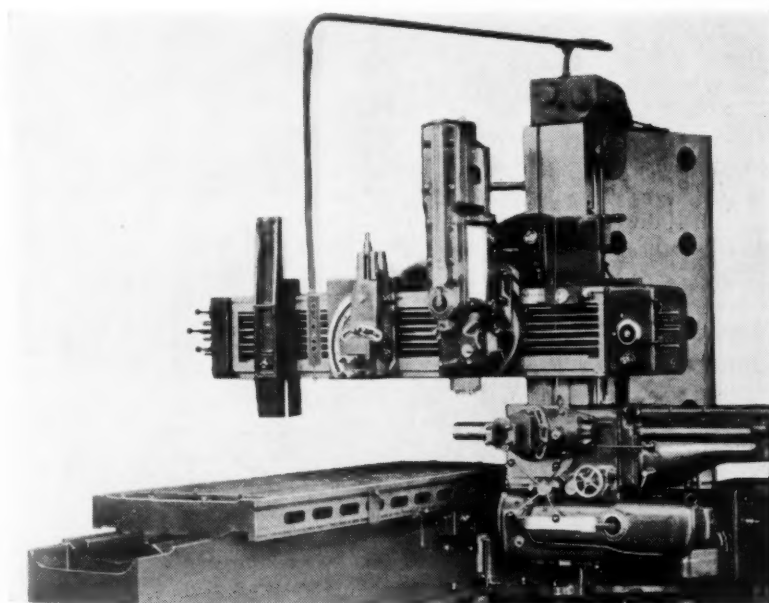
MILLING PLANER WITH SPECIAL EQUIPMENT FOR MACHINING HOLES, CROSS SLOTS, OR KEYWAYS TO PRECISION LIMITS
